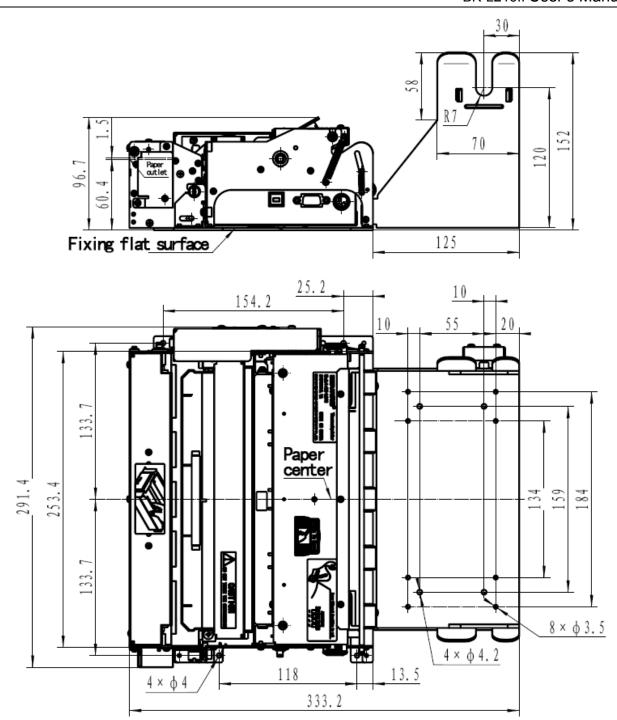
Dimension of horizontal paper holder (335*294*150mm)
